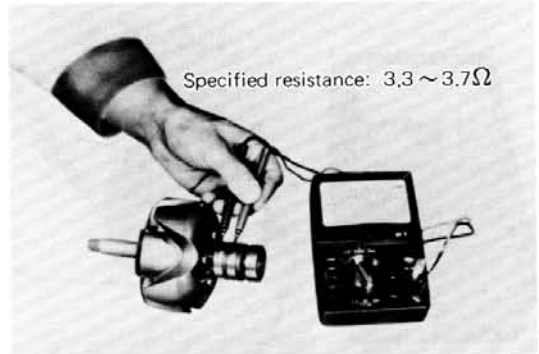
Testing Rotor Coil for Open & Short Circuits
